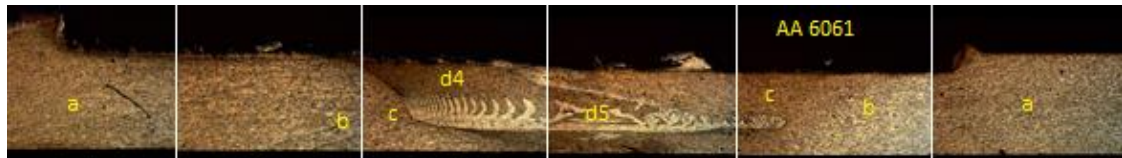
Microstructure of weld joint of AA 6061 welded at a speed of 68 mm/min.
